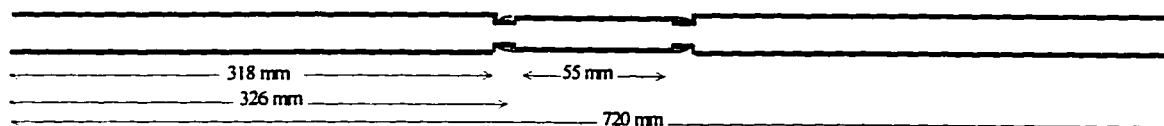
Dimensions of Membrane Reactor Tube Assembly
